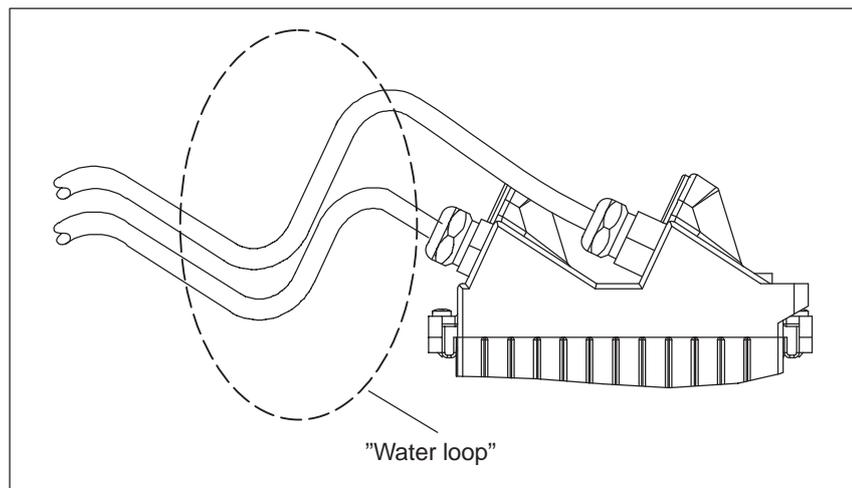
Cable connection at SIMODRIVE POSMO A with "water loop"
